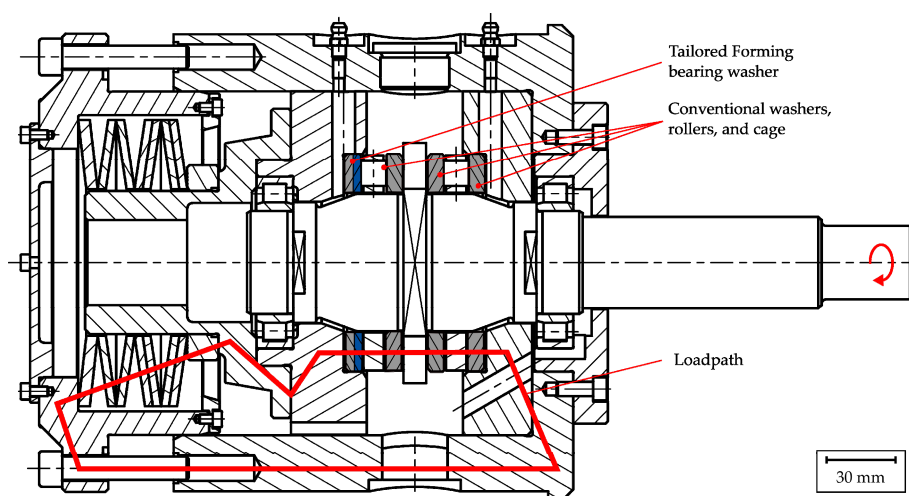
FE8 test head with type 81212 cylindrical roller thrust bearing.
